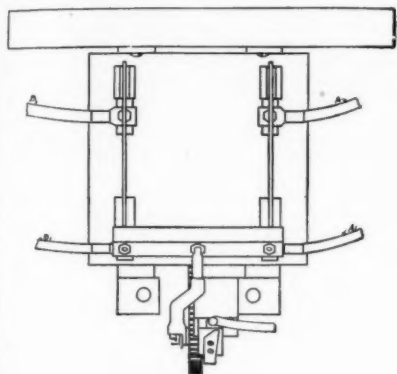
DETAILS OF MOTOR SWITCH FOR BOILER PRESSURE CONTROL.
